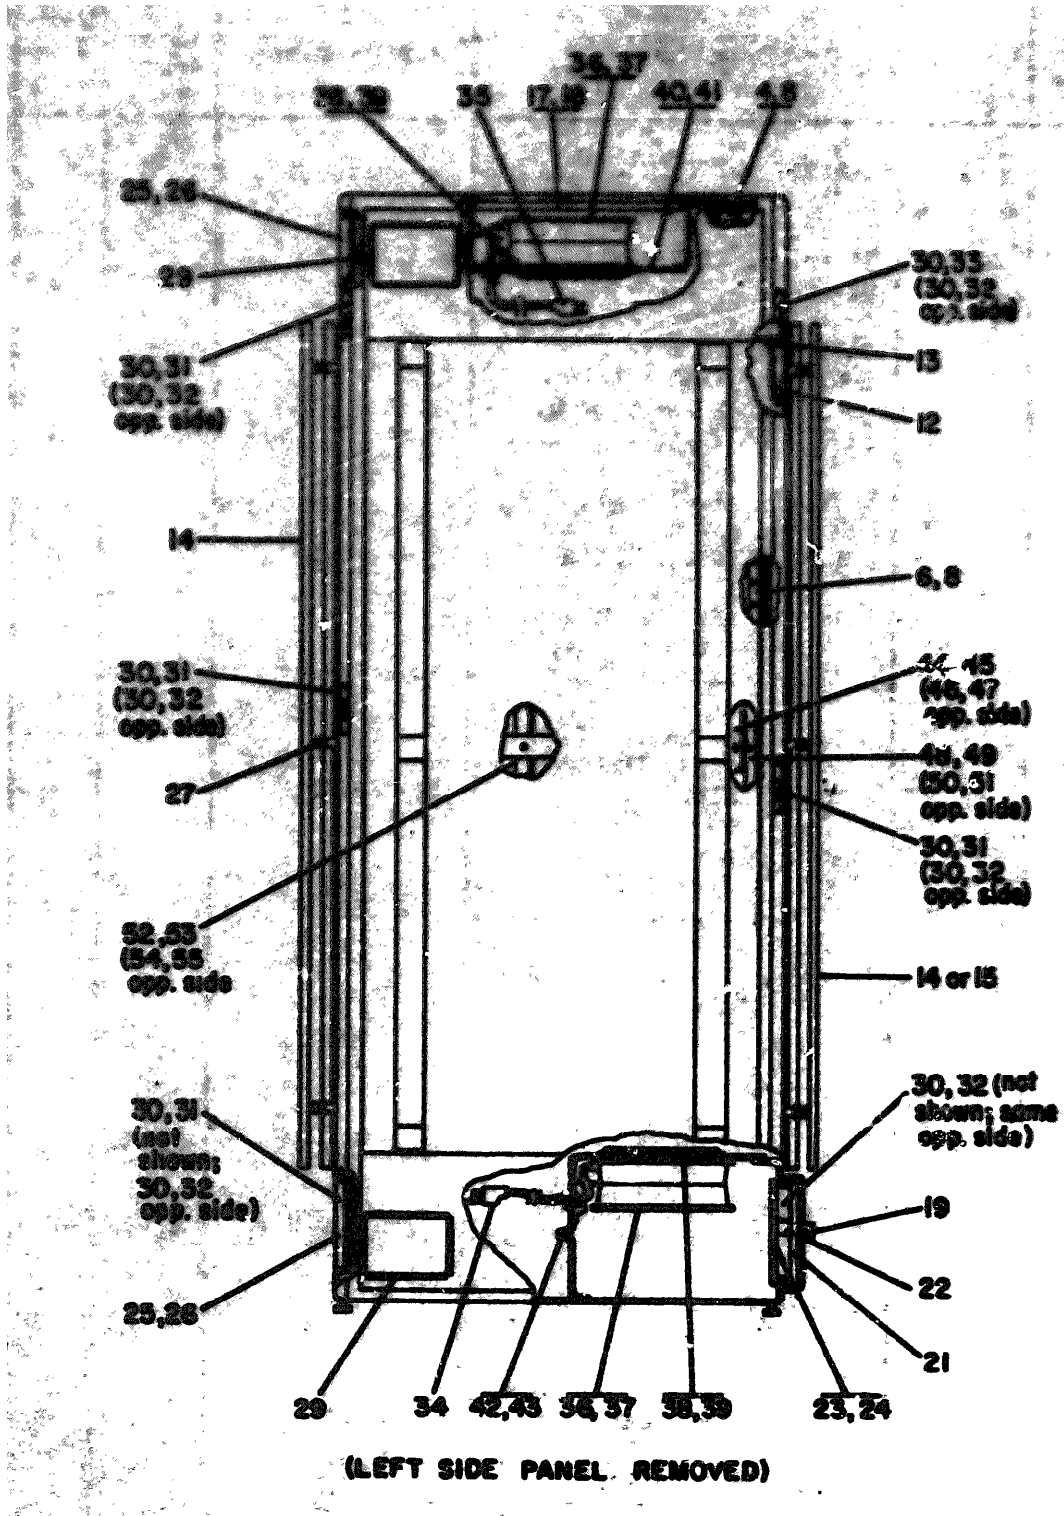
Cabinet, Electrical Equipment (EC-2456 and EC-2457) (Sheet 2 of 3).
